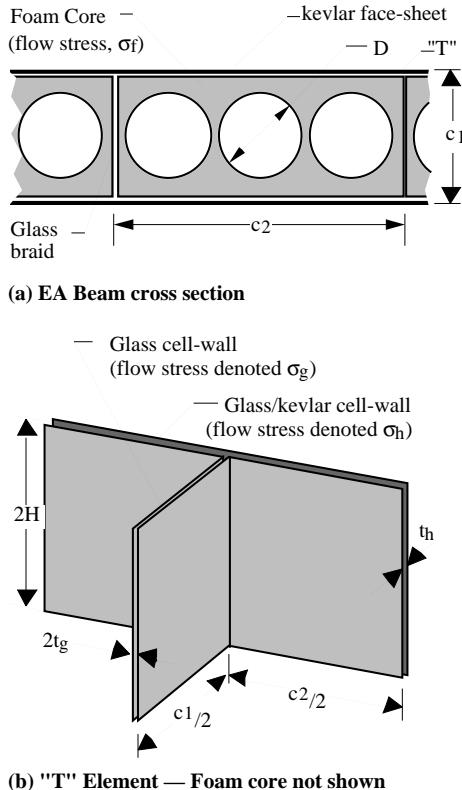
Schematic of (a) typical energy absorbing beam cross-section and (b) basic "T" element.
